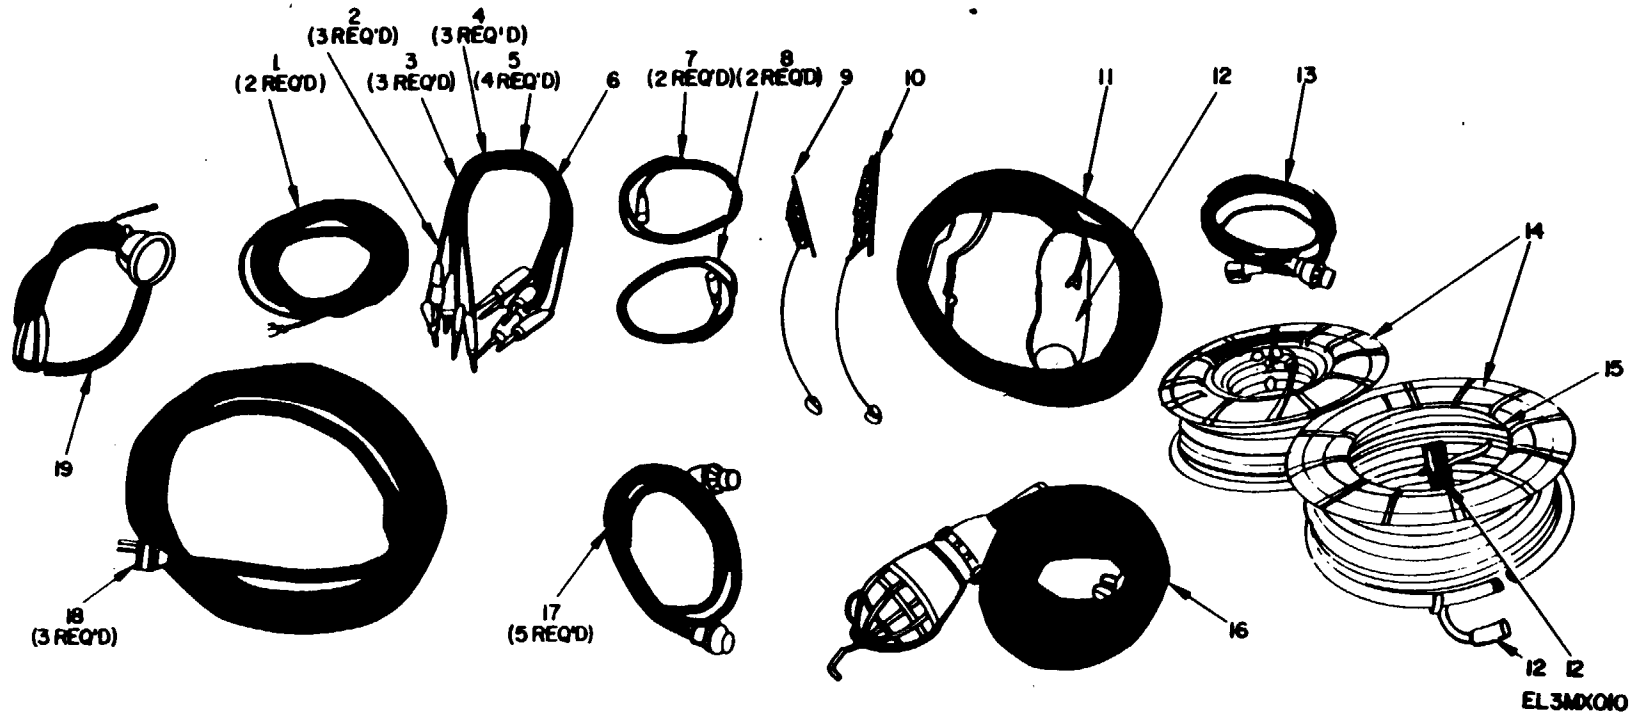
Shelter, Electrical Equipment S-372/MS-32A, Cable Assemblies.
